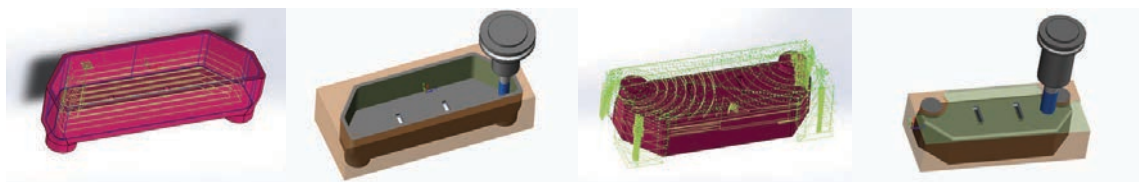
CAM software showing the toolpath in machining the rear lid split cavity A
